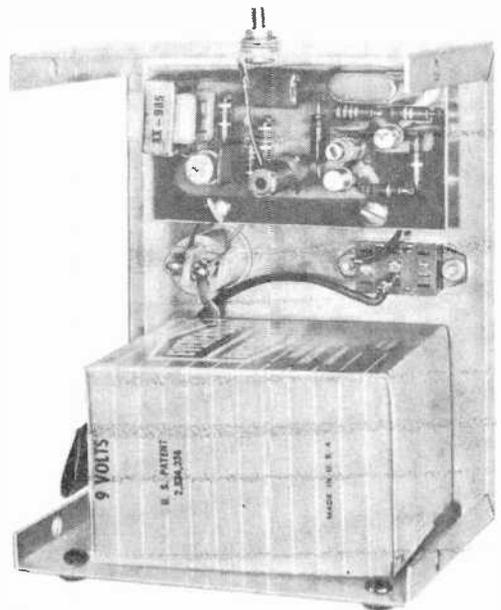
After installing the board and battery, cement a piece of $1/2''$ -thick foam rubber to the inside of the cover to hold the battery in place.
